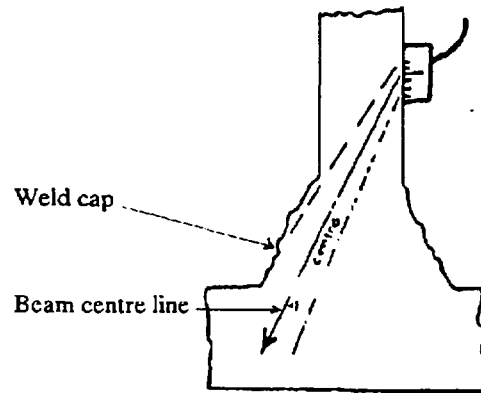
Angle beam probe scan to detect weld defects and lack of side wall fusion.
